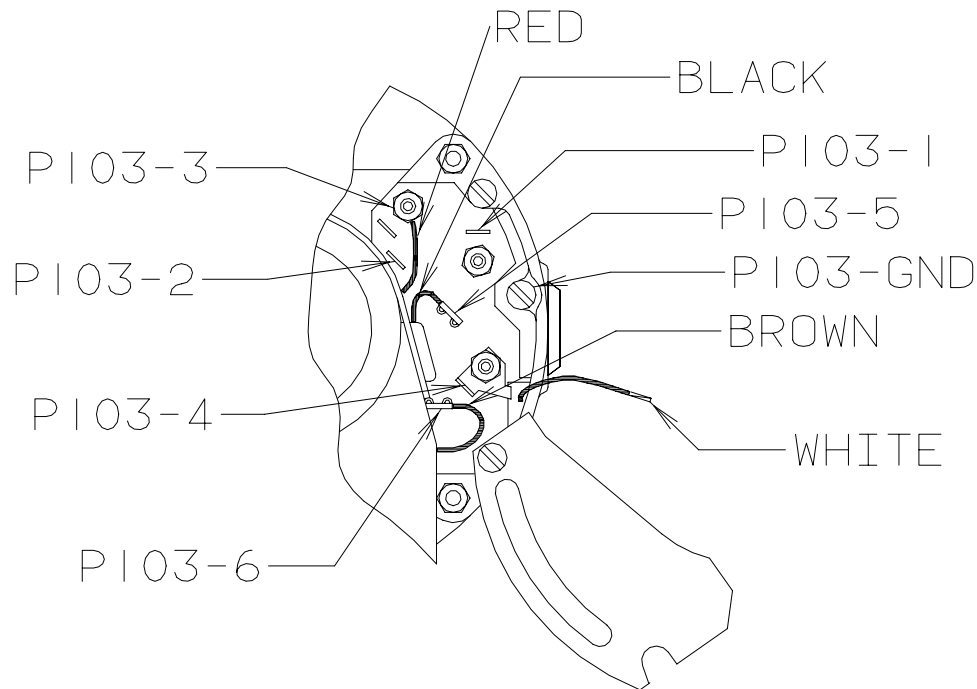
FUEL TRANSFER PUMP MOTOR CONNECTIONS
